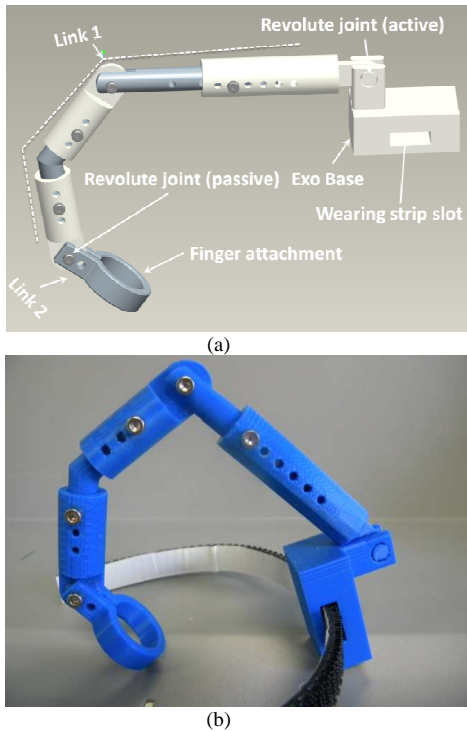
The un-actuated rapid finger prototype (a) CAD design (b) Prototype
